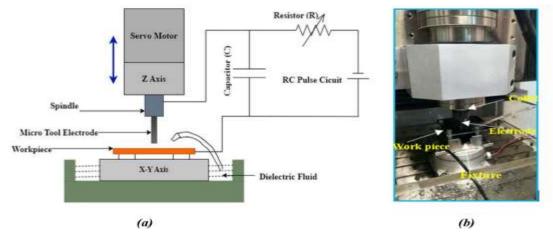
(a) Schematic diagram (b) photograph of Micro-electro discharge drilling on DT110 machine tool.
